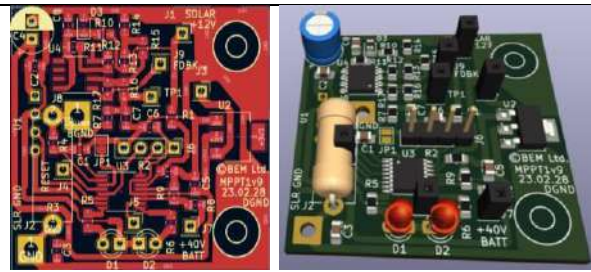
(a).Hybrid circuit PCB layout (b) Hybrid circuit 3D view
